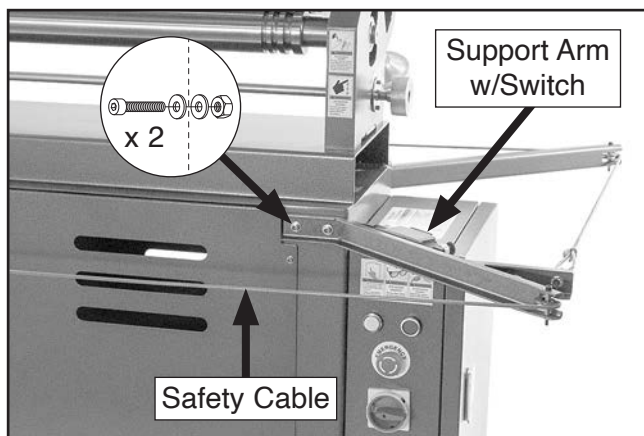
Location of pre-installed fasteners (safety cable shown installed for reference).
